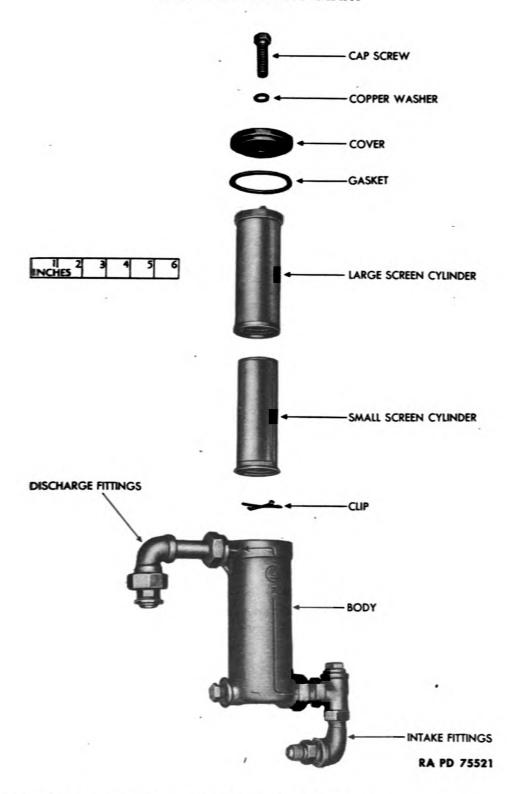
Steam Generating Plant Fuel Oil Strainer—Exploded View 237
